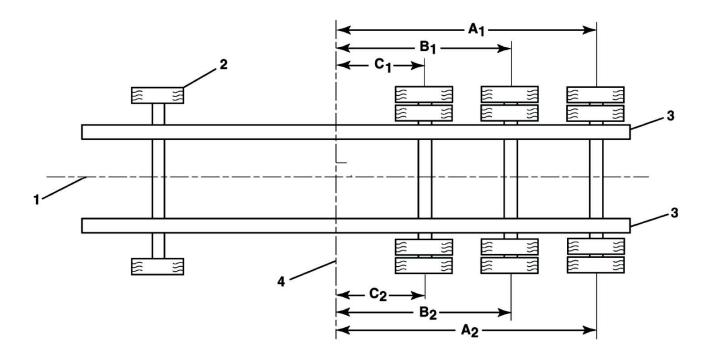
8 x 6 Chassis — A1 = A2, B1 = B2, C1 = C2 with a Tolerance of No More Than 1/8 inch (3.3 MM)
